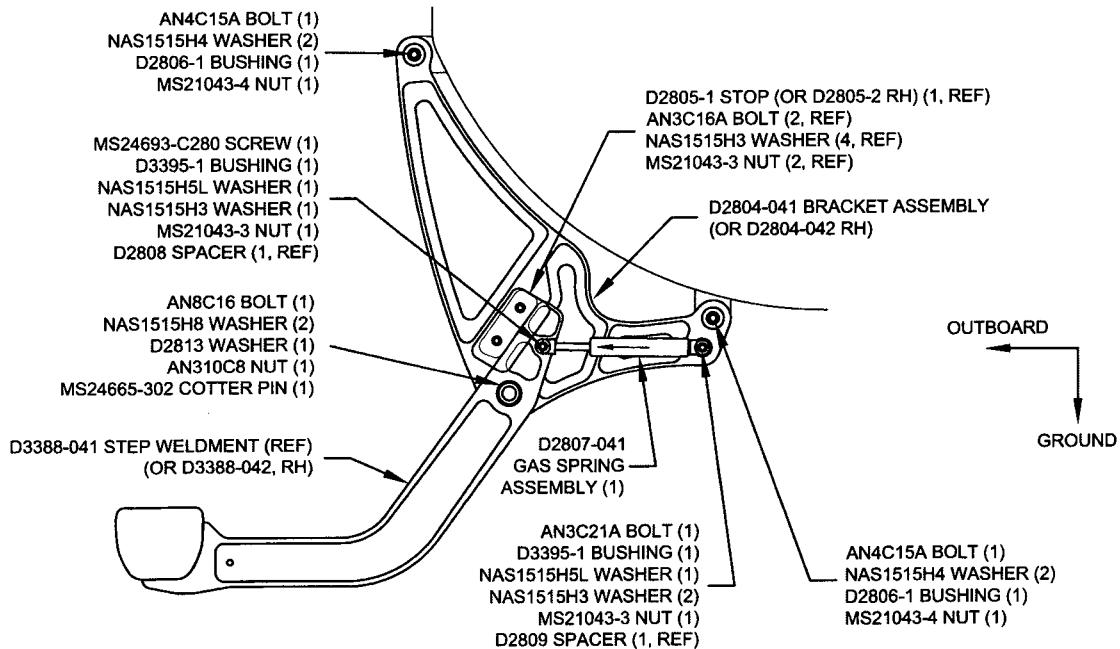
STA 155.06 for D412-630-023/-024 Heli-Access-Step™ Installation
